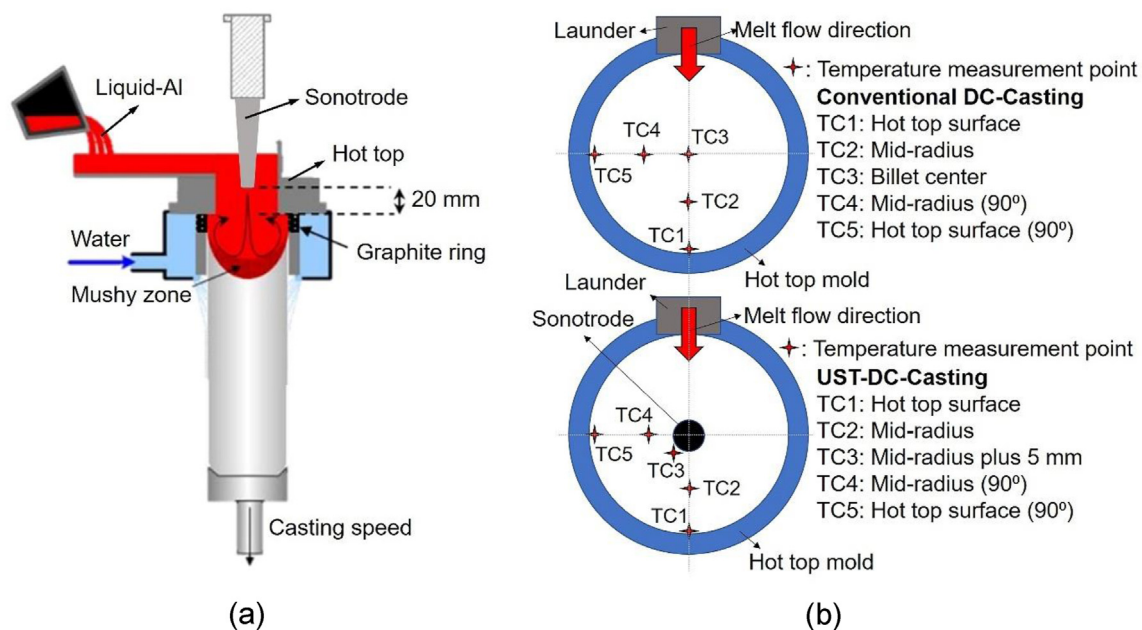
(a) Illustration of UST-DC-casting setup with ultrasonic sonotrode in the hot top (adapted from [25]), and (b) top-view of thermocouple positions across the hot top on both conventional DC-casting and UST-DC-casting.
